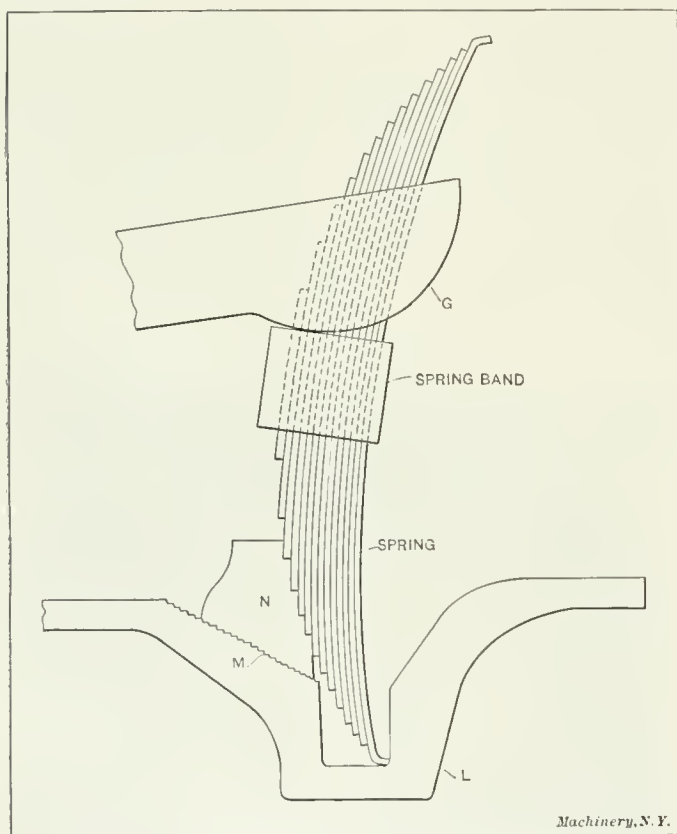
Heavy Spring in Position to have Band removed, showing the Use of the Grip Block
